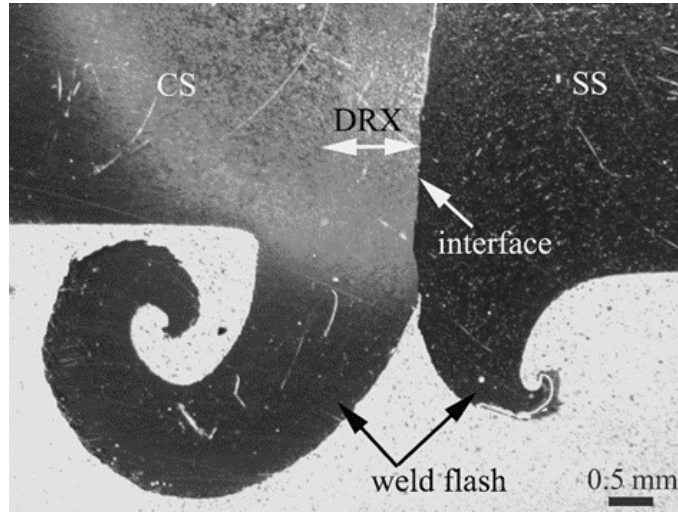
Macrostructure of the dissimilar friction welds with different amounts of weld flash.
